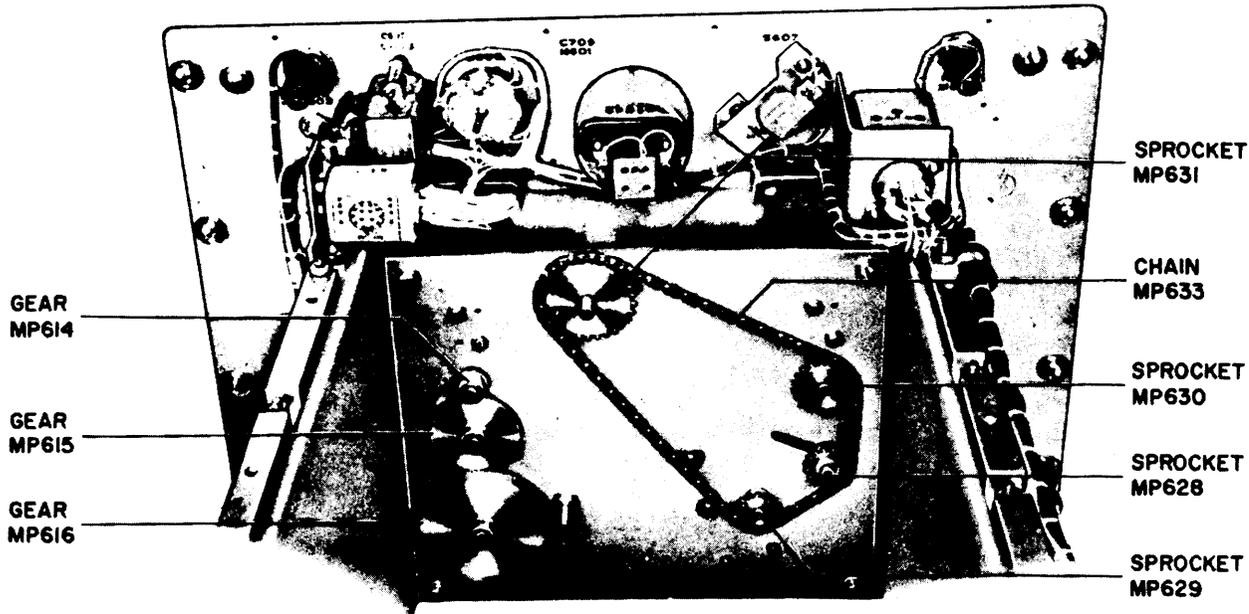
Electrical Frequency Control C-2764/WRT-2 Interpolation Oscillator, Replacement of Parts on Gearbox Back Plate
